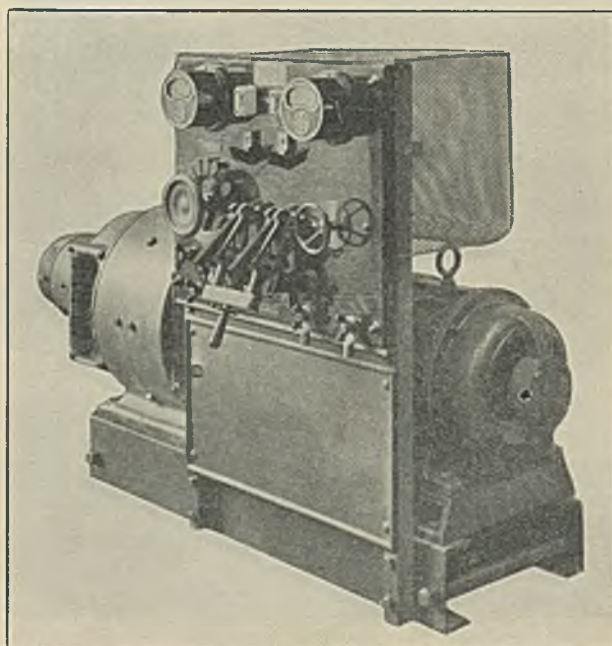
Holmes Arc-welding Equipment.
